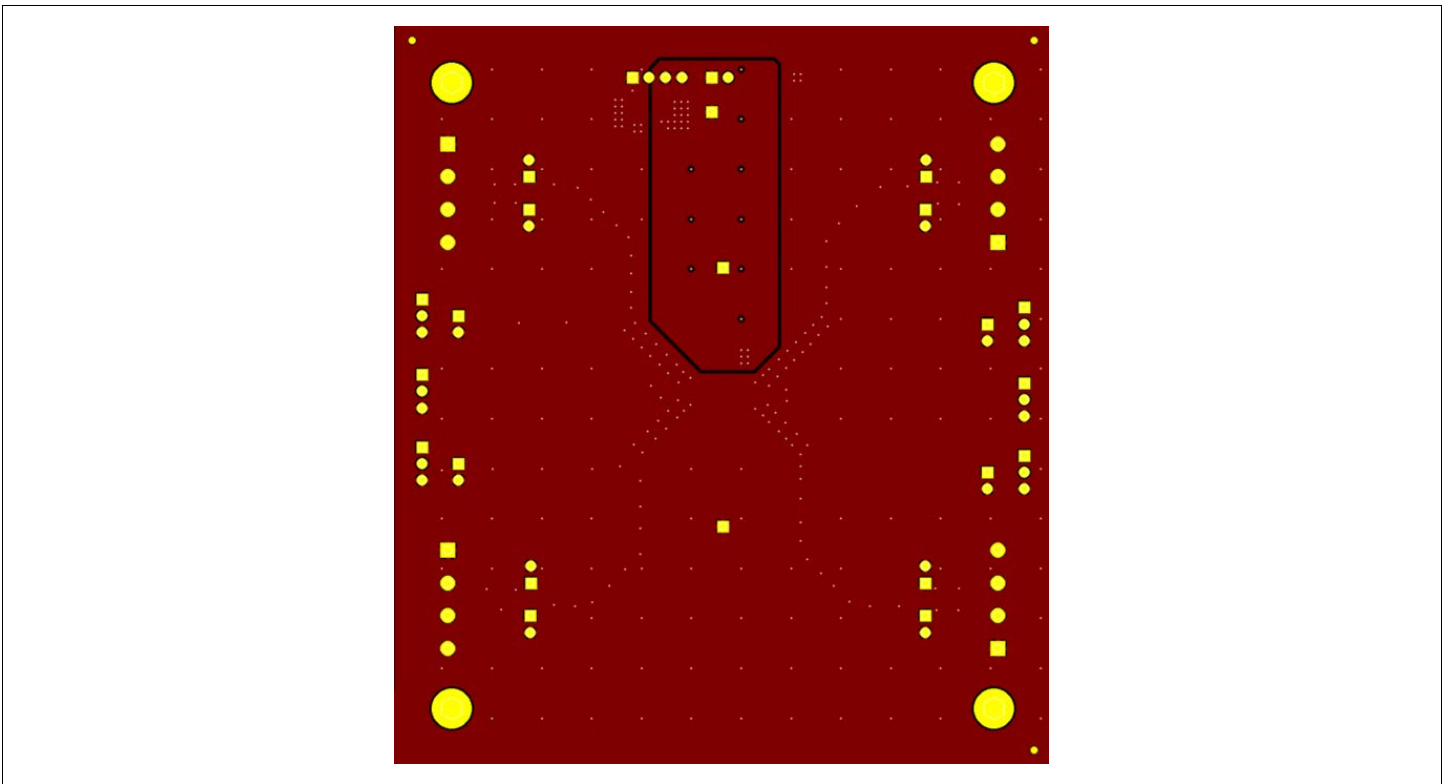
EVK PCB Layer 4—Bottom View (NSOIC16)
